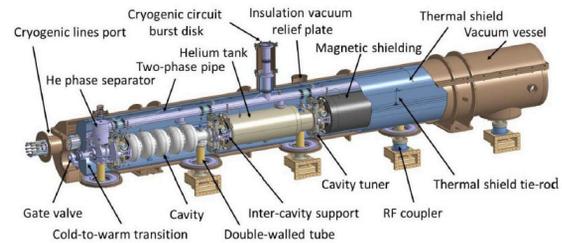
General assembly view of the SPL cryomodule considered to be adapted for PERLE.
